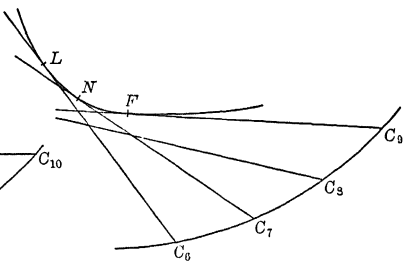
IMPOSSIBLE CASE FOR STRAIGHT EDGE FOLLOWER WITH SLIDING CONTACT
